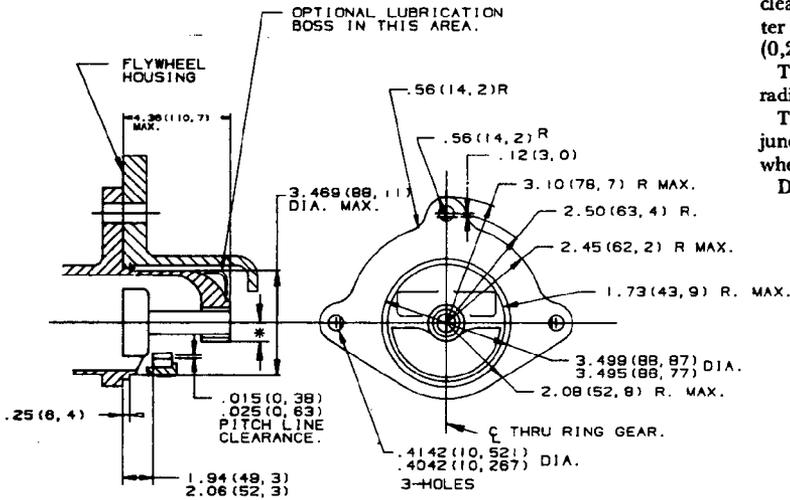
TYPE NO. 1 MOUNTING FLANGE MEDIUM DUTY
